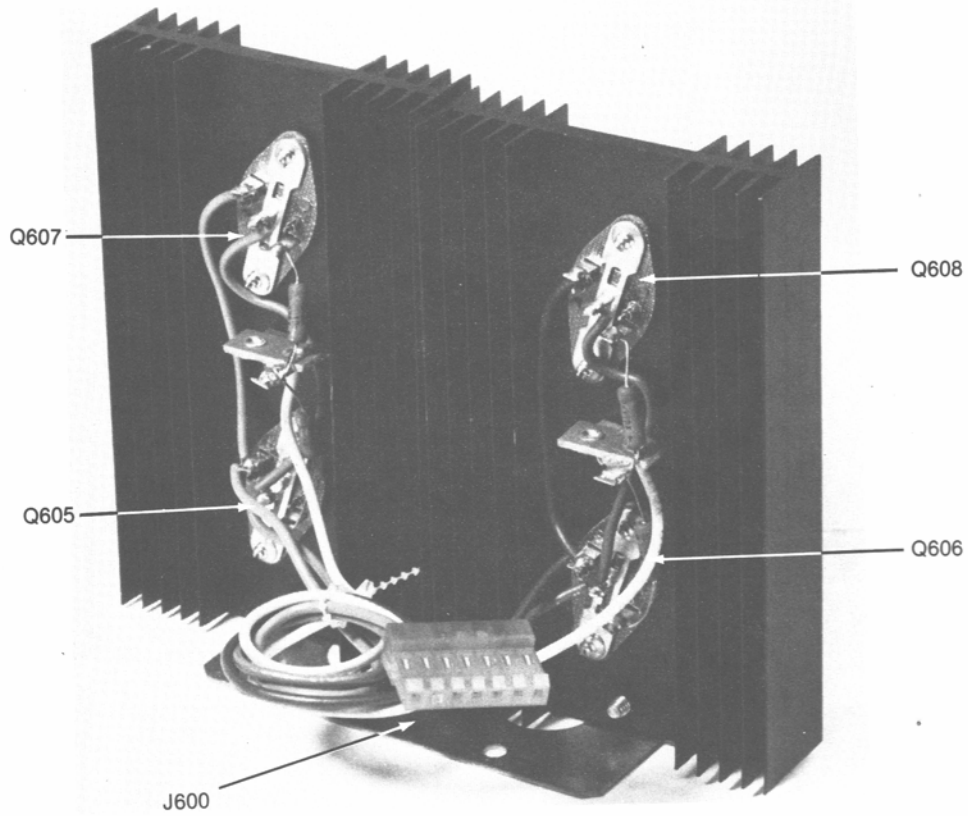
Y Output Amplifier/Heat Sink Assembly, 38A5767-000
